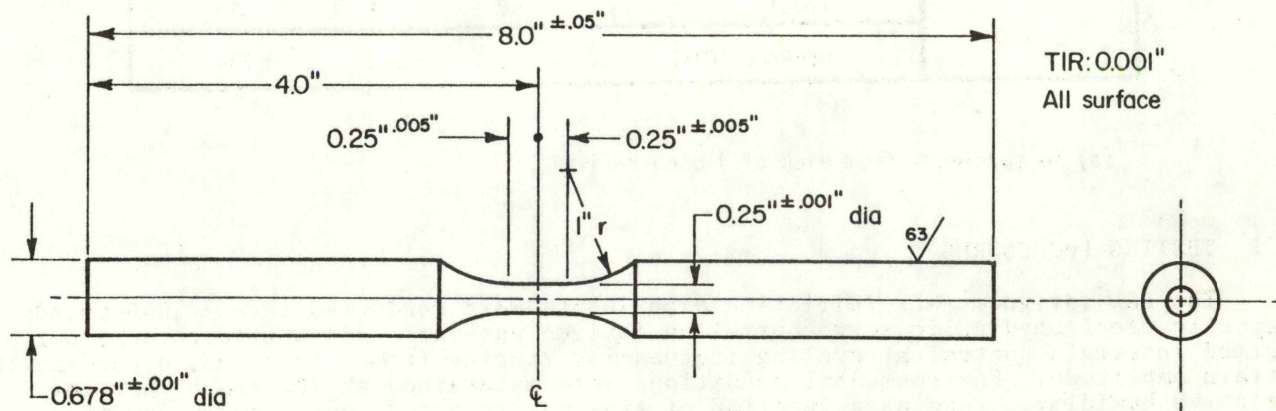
BCAC UNIAXIAL FATIGUE TEST SPECIMEN
